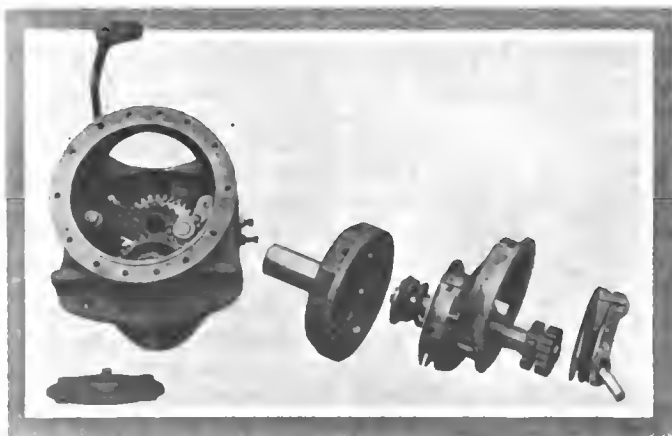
Two-speed sliding gear, multiple disc clutch, and relating parts, with housing and details
